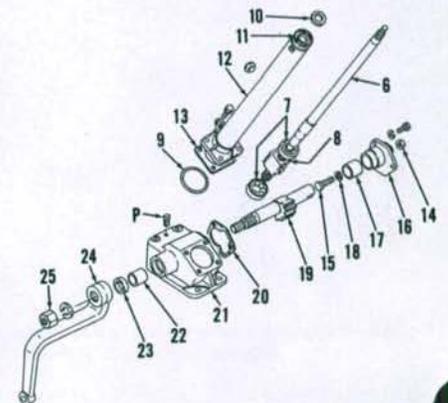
Exploded view of steering gear typical of type used on YM195, YM195D, YM240, YM240D, YM330 and YM330D models. Refer to Fig. 5 for legend.
